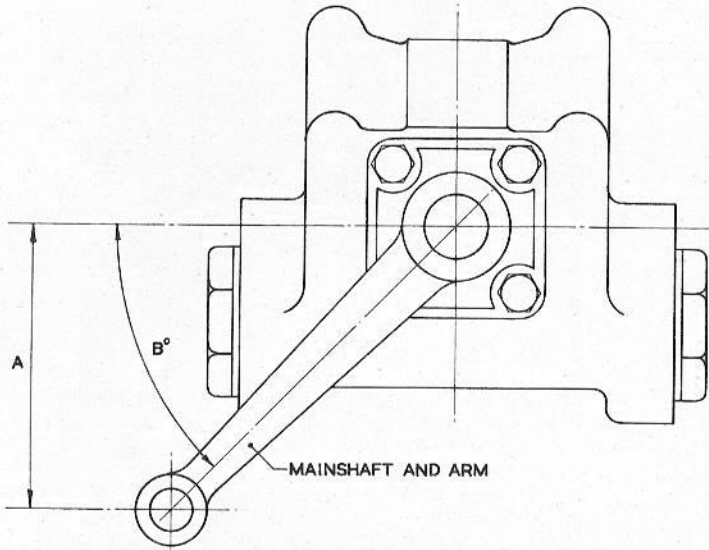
NO LOAD SETTING OF MAINSHAFT AND ARM.
